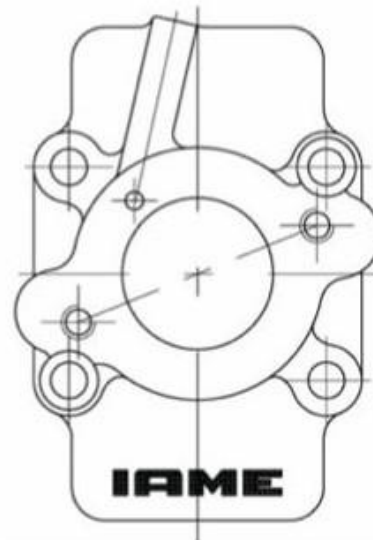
PHOTO IDENTIFICATION CARBURETTOR INLET CONVEYOR
